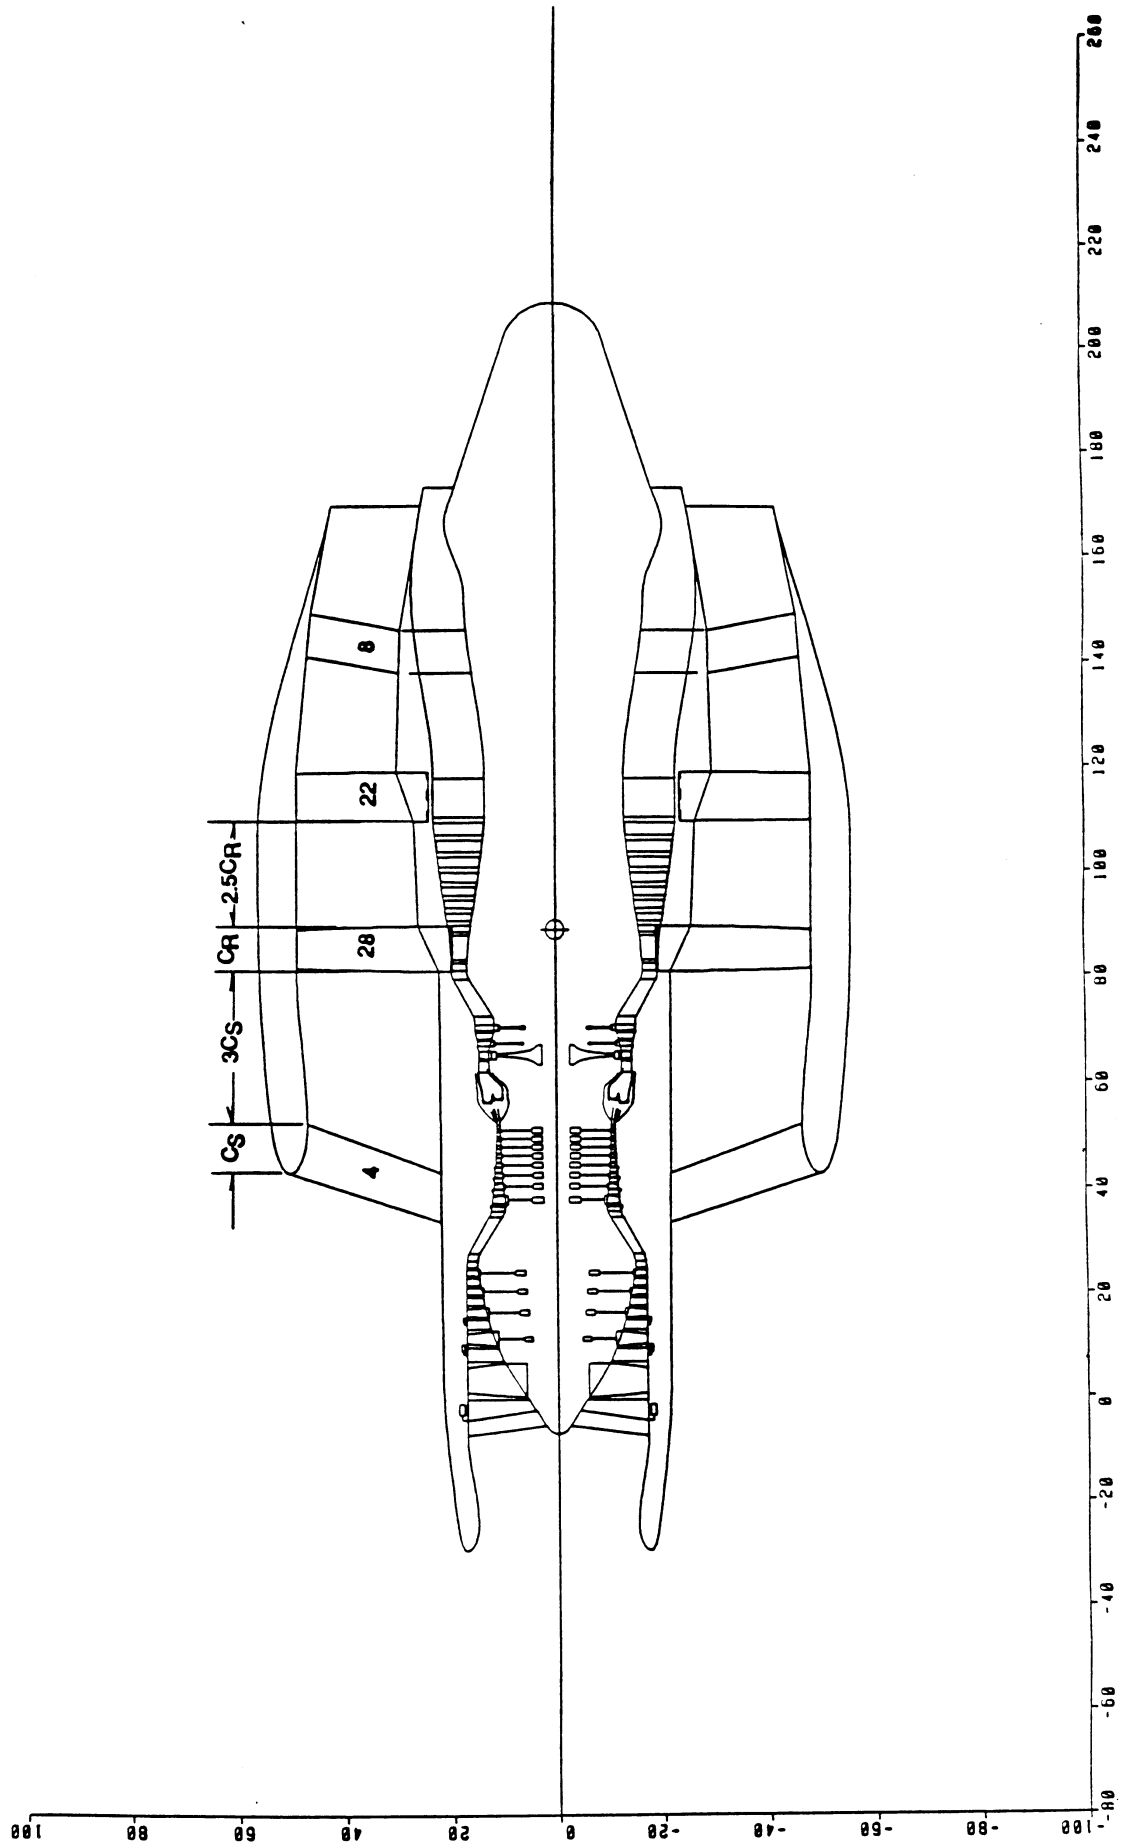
Aft Direct-Drive Counter-rotating Fan Engine 6 Cross-section
